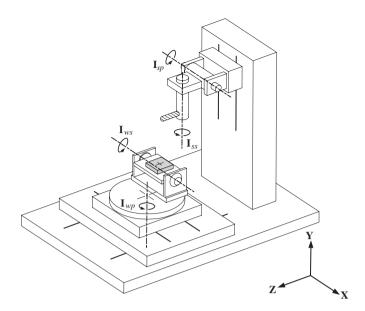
Generalized five-axis machine tool with four rotational degrees of freedom
